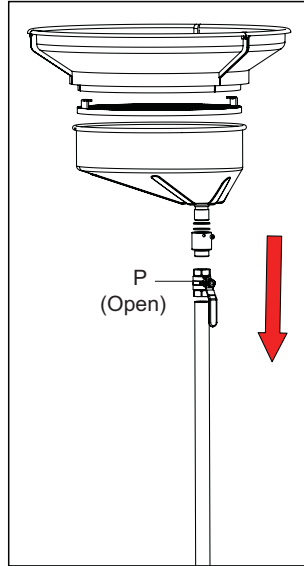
Assemble the rotor tube, ball valve (P), collecting bowl, filtrating plate and extension funnel orderly.
